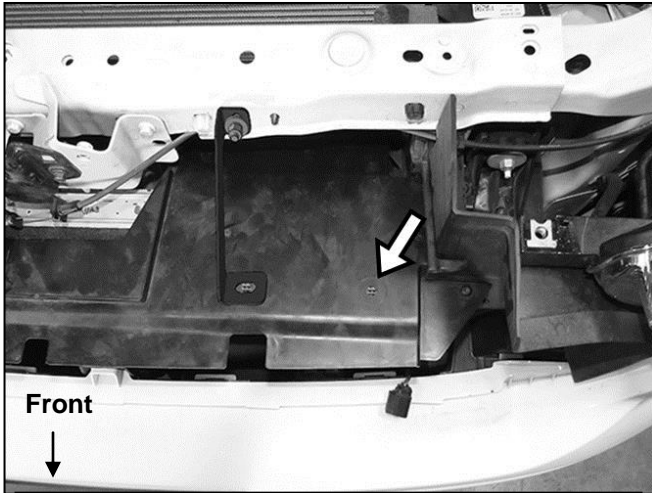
Ranger Models. Reinstall plastic inner shield. Attach Support Bracket to front of radiator core support. Mark location of slot in Support Bracket onto top of plastic shield. Remove shield and drill a 5/16" hole through marked location. Reinstall shield
